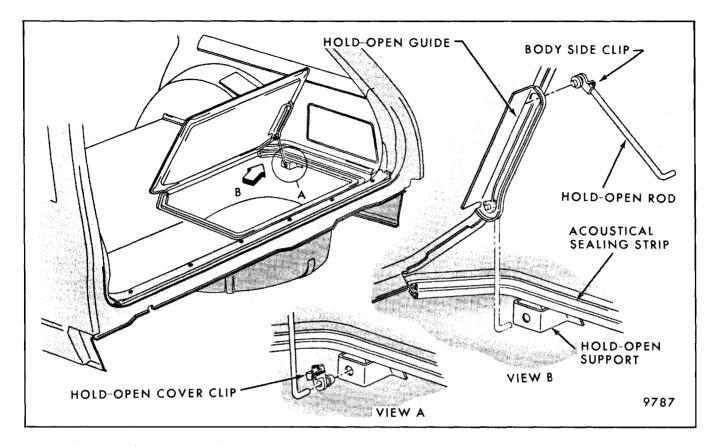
Spare Tire Cover Panel Hold-Open Rod and Sealing Strip Installation - A Styles
